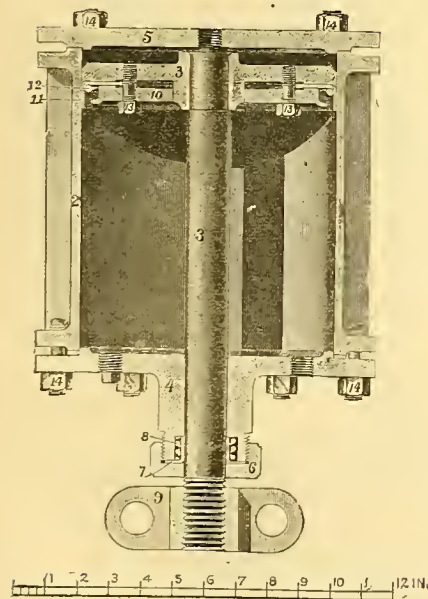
STANDARD (EIGHT-INCH) BRAKE-CYLINDER,
